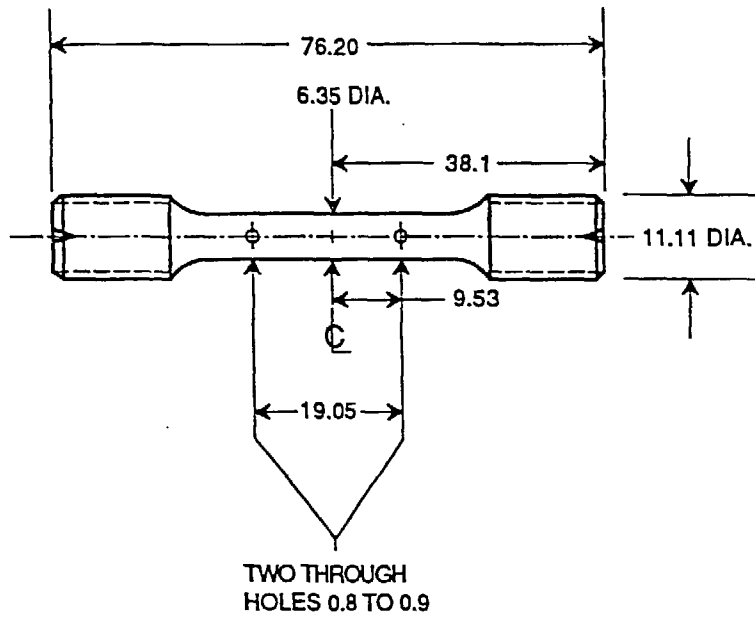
Fabrication Drawing for SSRT Specimen. Dimensions are in mm.
